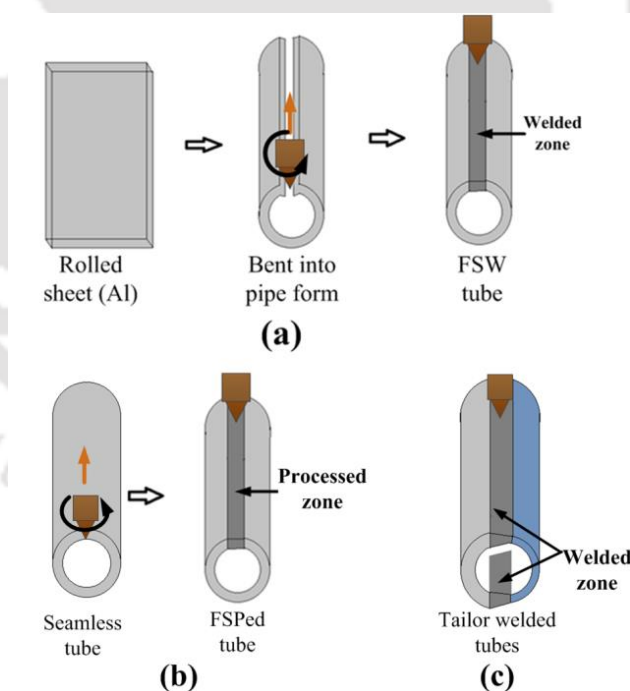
(a) FSW of rolled sheet into pipe form, (b) FSP of normal tube, and (c) fabrication of tailor made tubes through FSW
